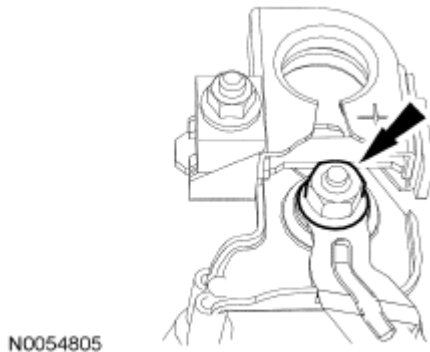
Locating Power Feed To Battery Terminal And Nut
